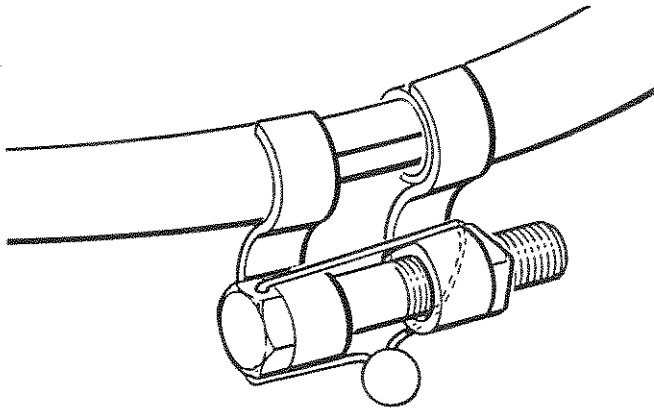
Wire Seal for Drum-Type Containers with Drilled-Head Closure Bolts
